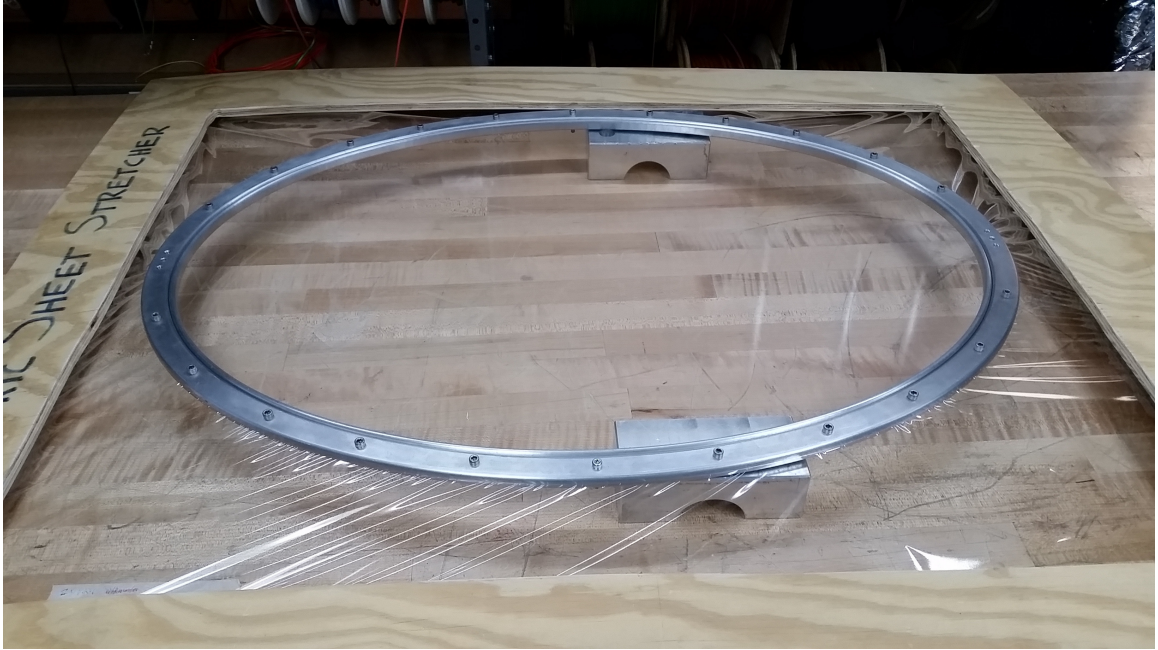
The apparatus for stretching the dielectric sheet taut. The sheet is first taped on the plywood frame and then hung over the elevated elliptical ring.
